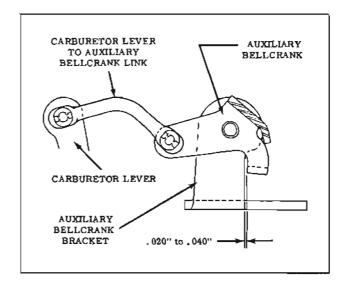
Carburetor Lever to Auxiliary Bellcrank Adjustment (2 Barrel)
